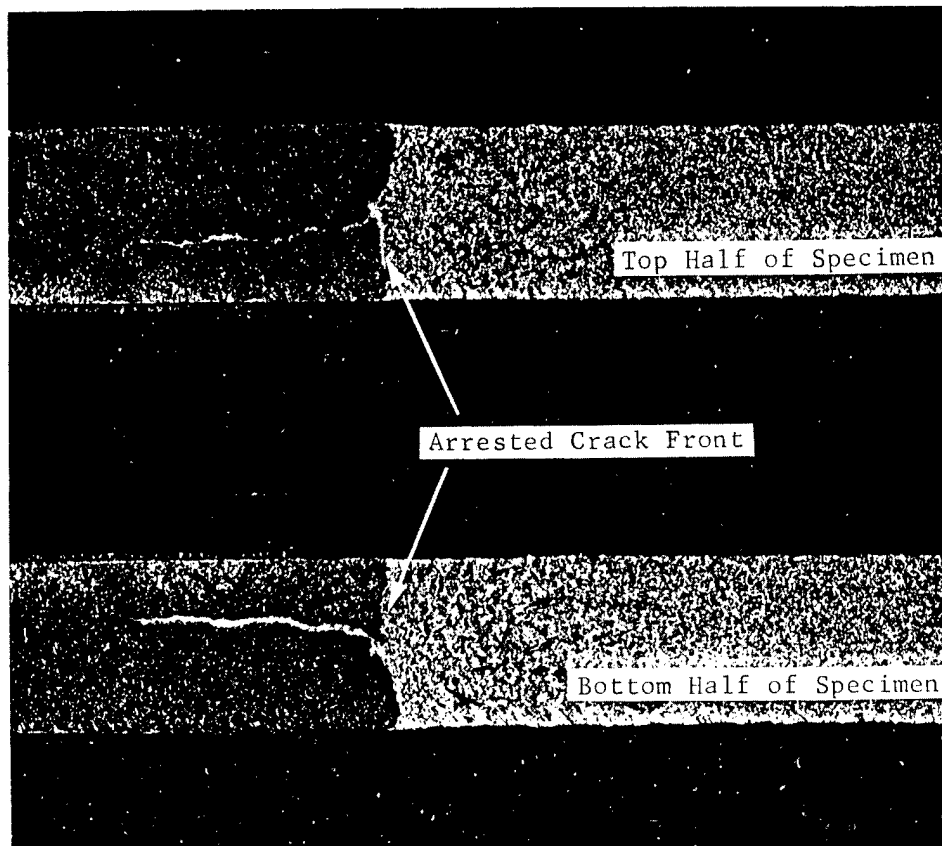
PHOTOGRAPH OF AN ARRESTED CRACK FRONT. The crack front, which propagated from left to right, was produced by wedge loading a A533B steel DCB-test piece (with deep sidegrooves) at -78°C . The front was delineated by heat tinting the surface of the arrested crack (dark area) and then breaking the specimen open (light fracture).
